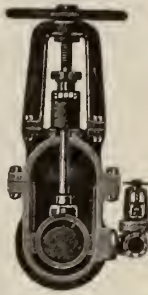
Ex. Hvy., Outside Screw, Flanged, with By-pass
